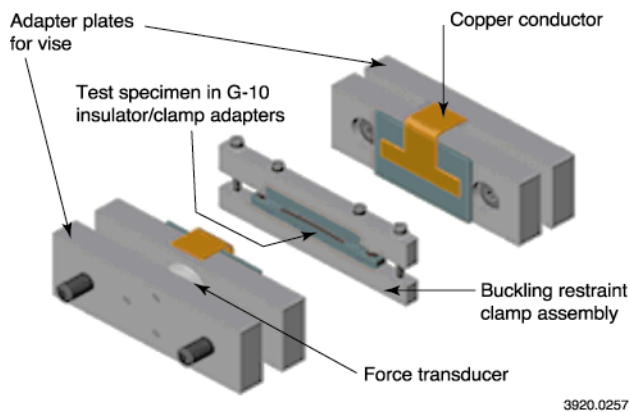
Exploded view of transverse electrical conductivity fixture (machinist's vise not depicted)
